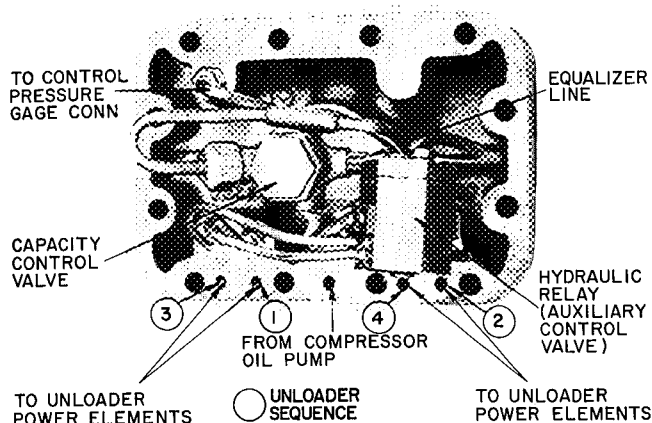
Compressor Handhole Cover and Assembly (5F40 and 5F60)
